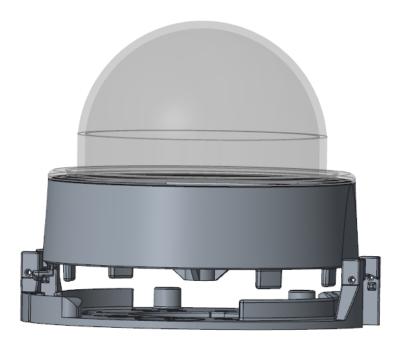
Showing matching supports on bracket and chassis creating guidance
